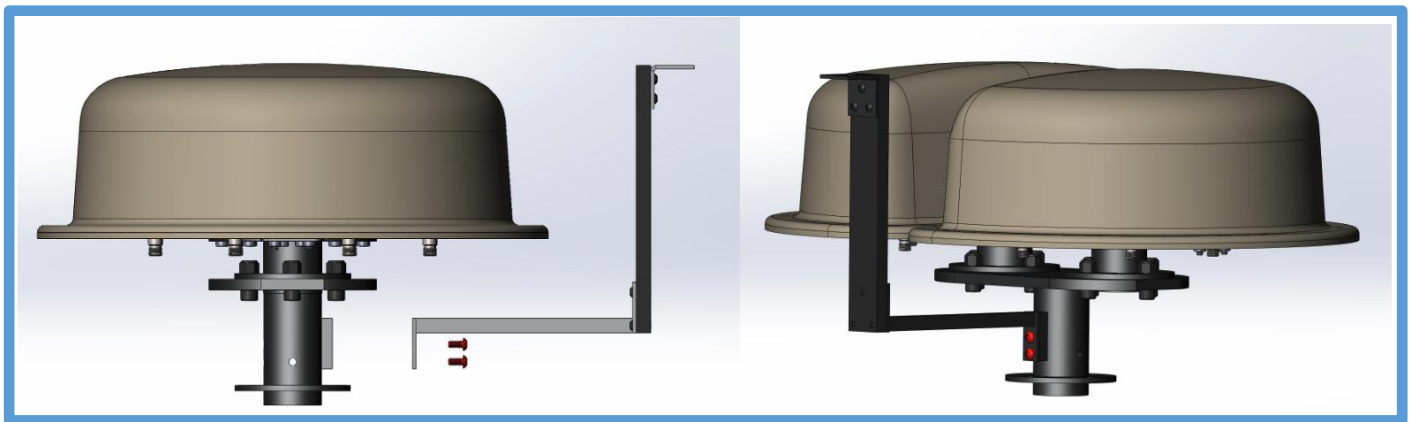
SkyView-DIVR MKII OMNI Antenna Arm Assembly Guide
